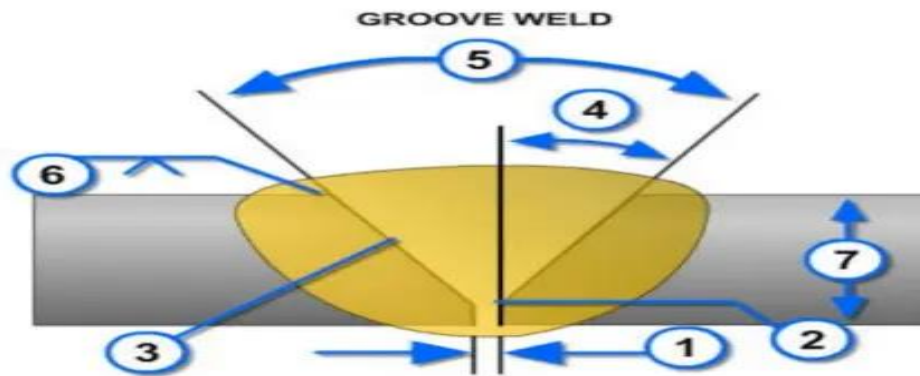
Groove welding nomenclature representation of horizontal position
